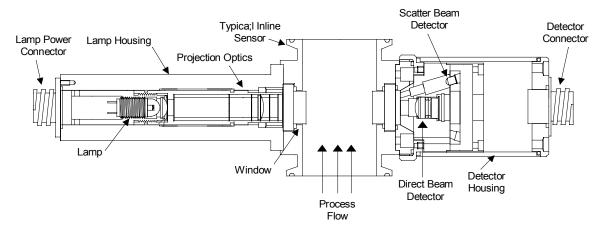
Exploded View of Typical OUSTF10 Inline Sensor (with OUA260 Flow Cell)
